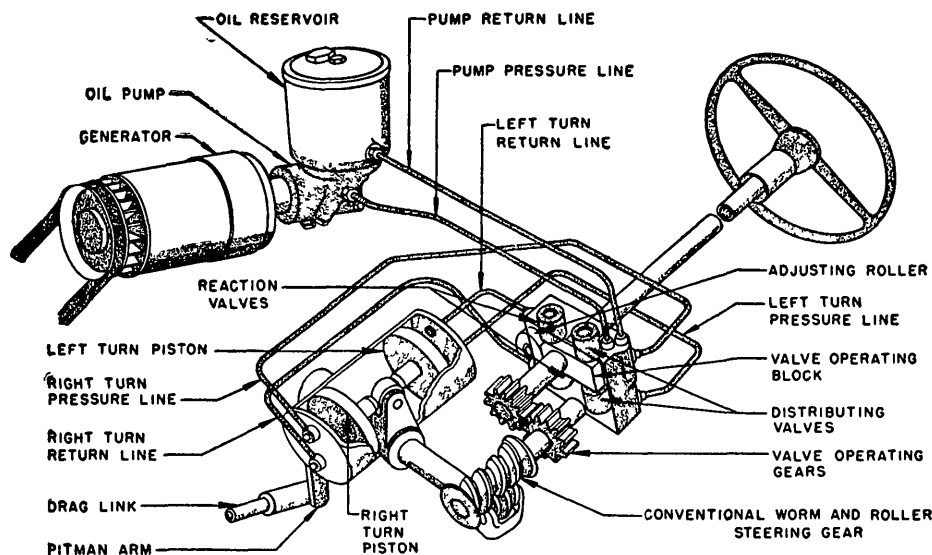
Schematic drawing of Gemmer "Hydraguide"
